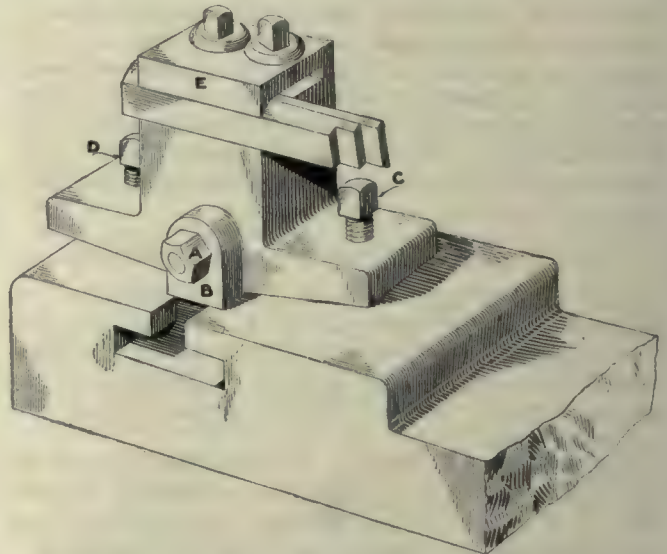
TOOLPOST FOR THE SCREW MACHINE
